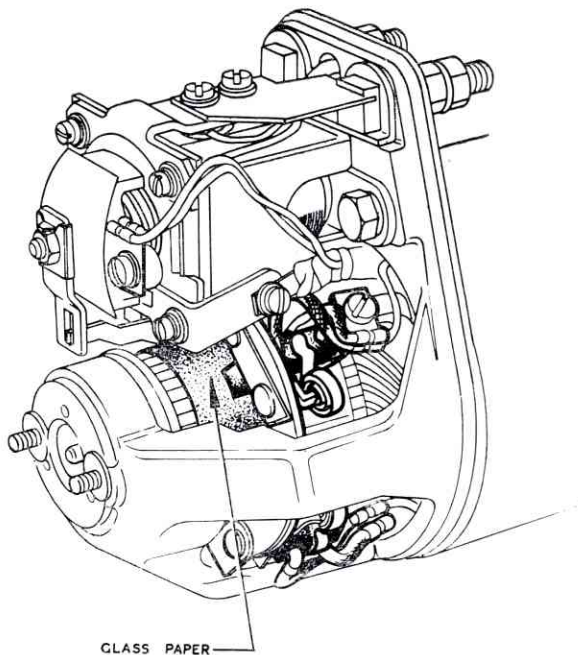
BEDDING STARTER MOTOR BRUSHES
